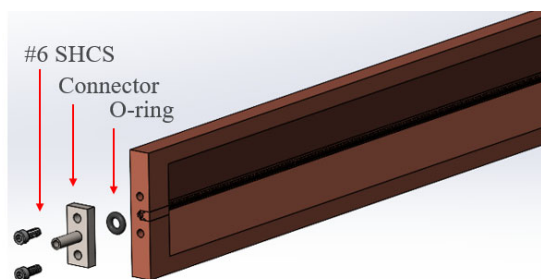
Schematic of leak check after brazing or machining the corrugated tubing-strongback (CTS) unit.
